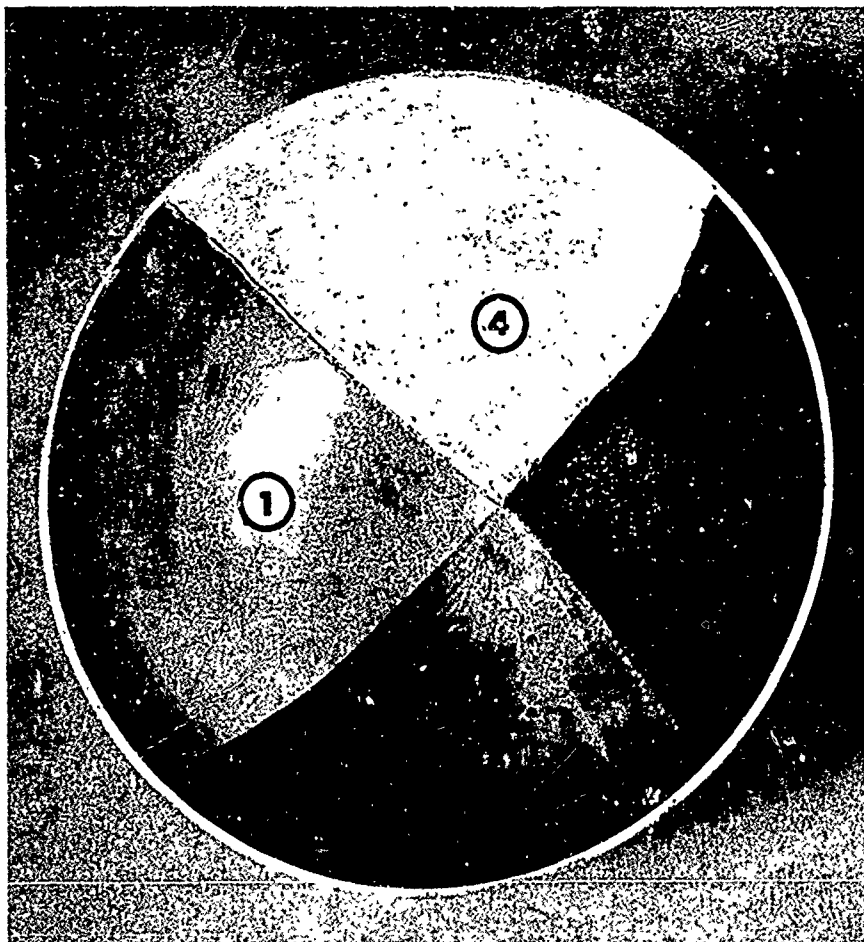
FULL VIEW OF A MOCK-UP SHOWING THE STEPS TAKEN IN THE MANUFACTURE OF THE EXPLOSIVE LINER PACKAGE
